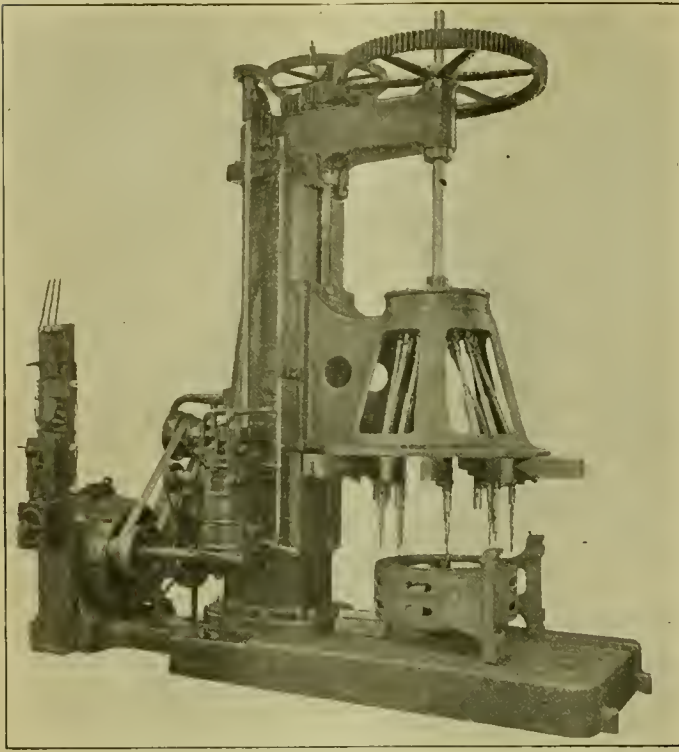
MULTIPLE SPINDLE DRILL.—BAUSH MACHINE TOOL COMPANY.
